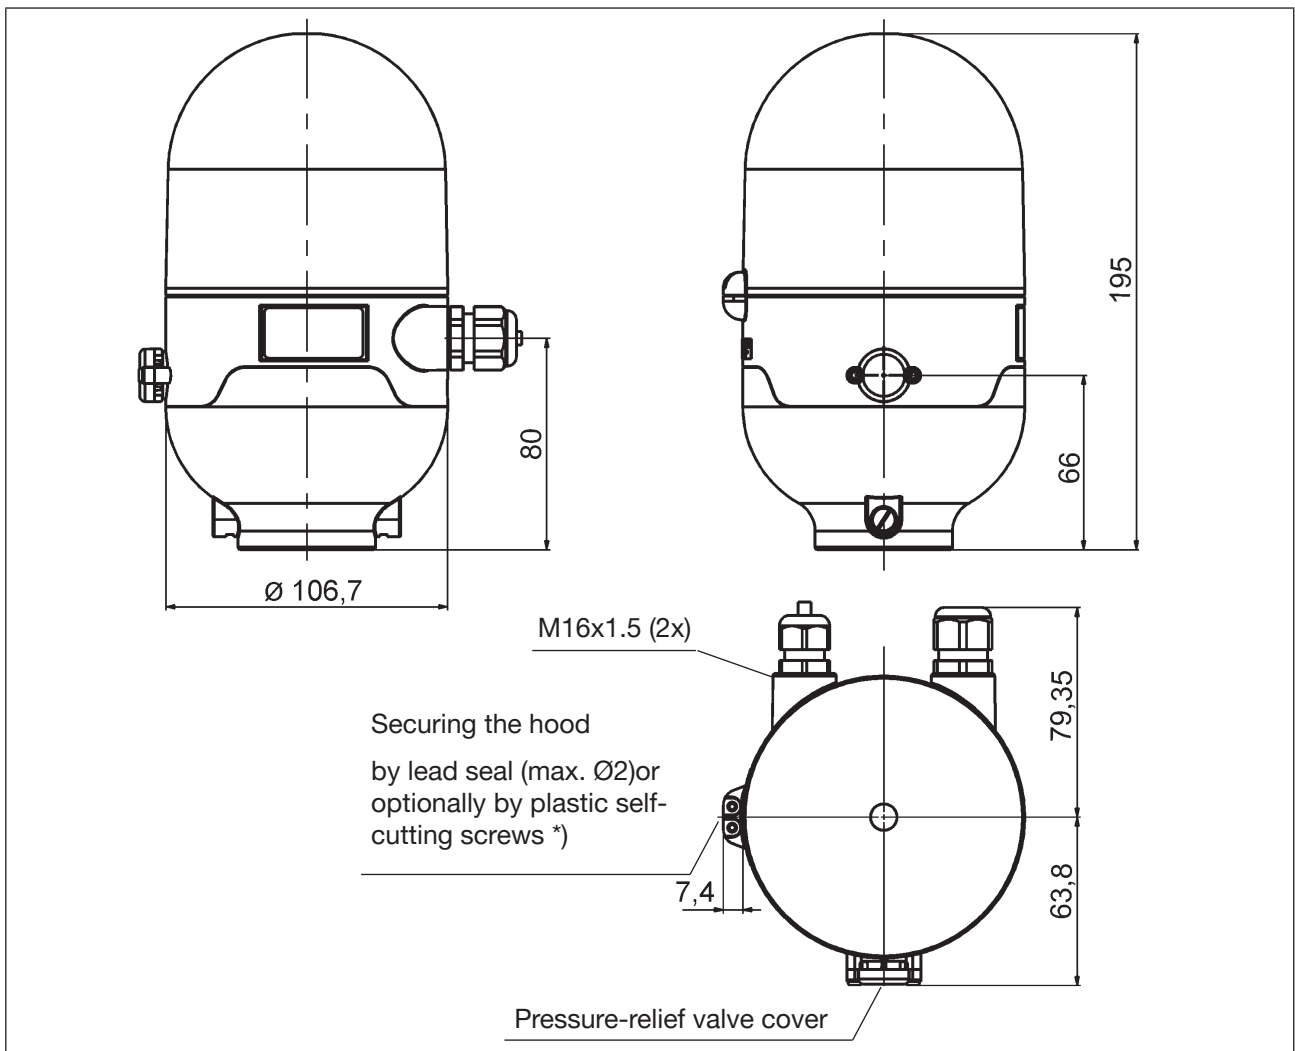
Dimensional drawing (for designs without solenoid valves)
